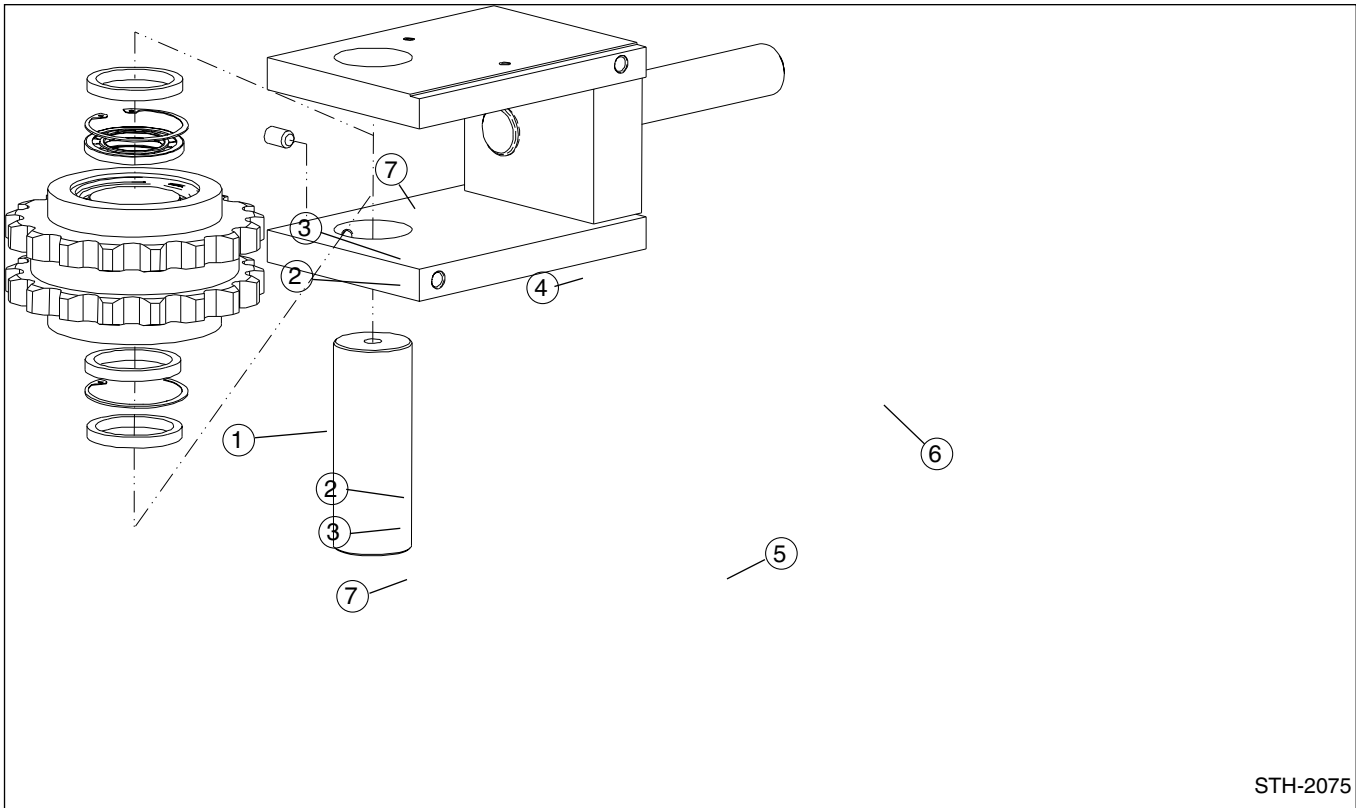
FIGURE B - RECIPROICATION TAKE UP ASSEMBLY
